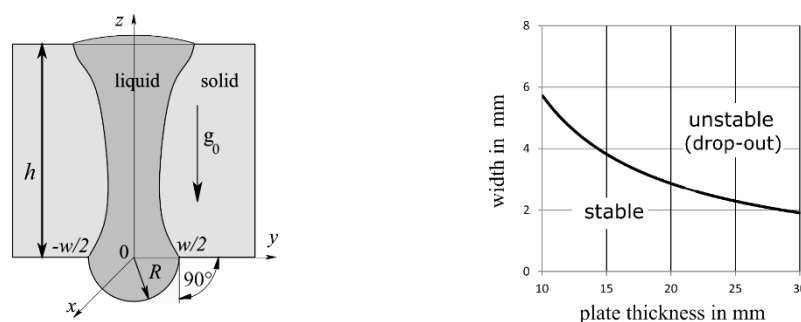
Geometrical sizes on the root side of the weld pool (left) stability criterion for liquid steel (right) [9].
